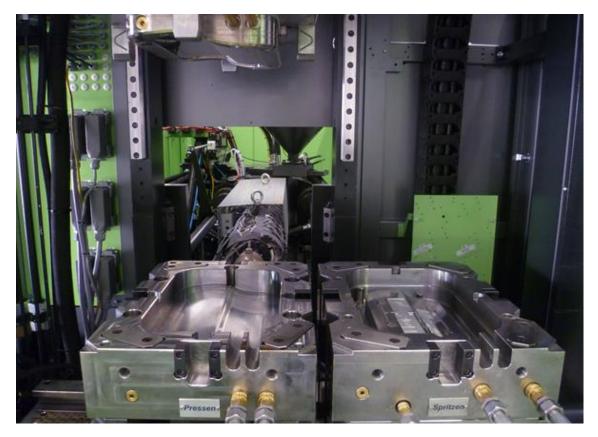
Pressing unit opened with the pressing and injection moulds.
